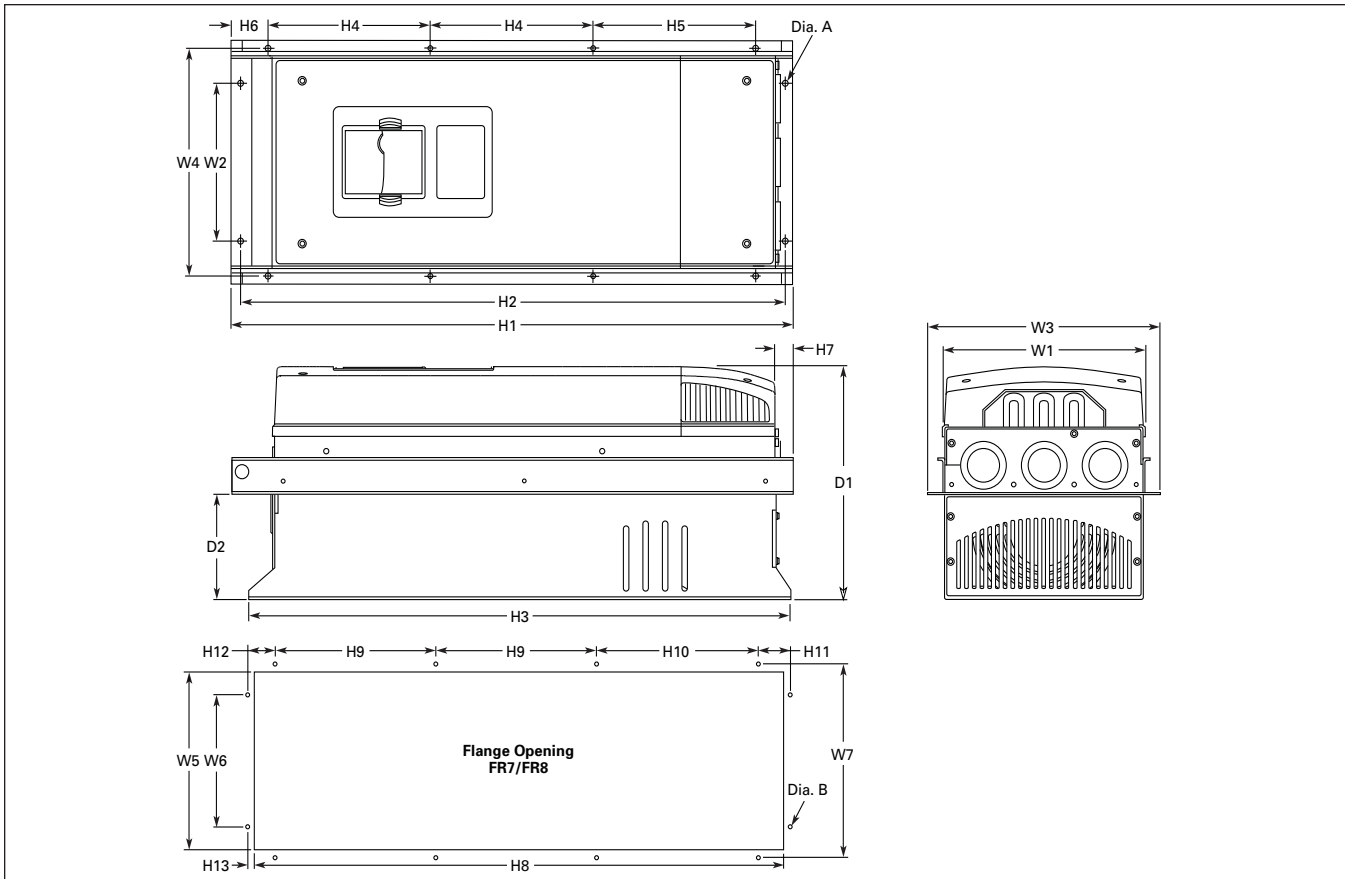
VSD Series Open Drive Dimensions, TYPE 1 and TYPE 12, with Flange Kit, FR7 and FR8
